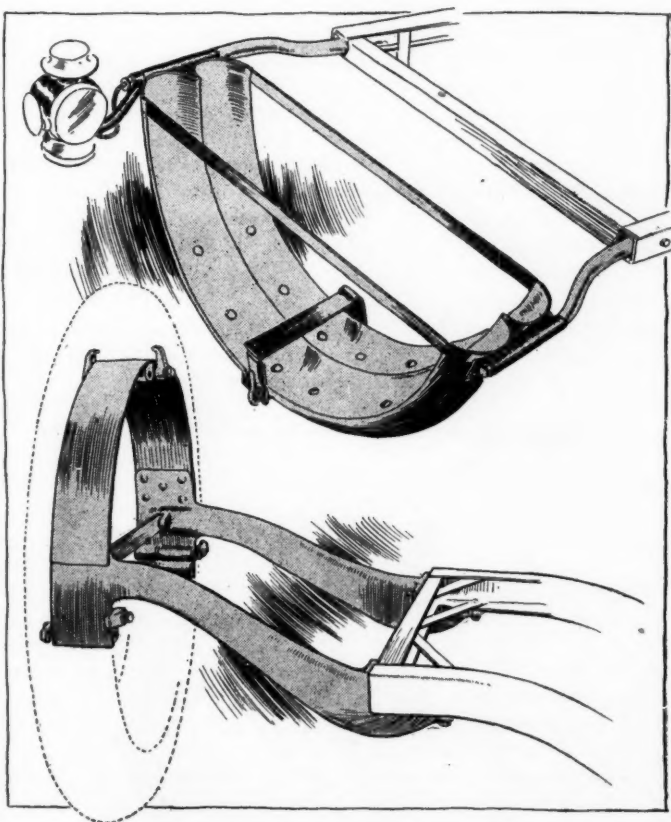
Above: Double-tire carrier at rear of Oldsmobile, supported on tubular brackets and provided with a means of locking in the spares. Below: Rear carrier on Havers Six, which supports spare by clamping on rim. The brackets are made to form a continuation of the chassis lines
